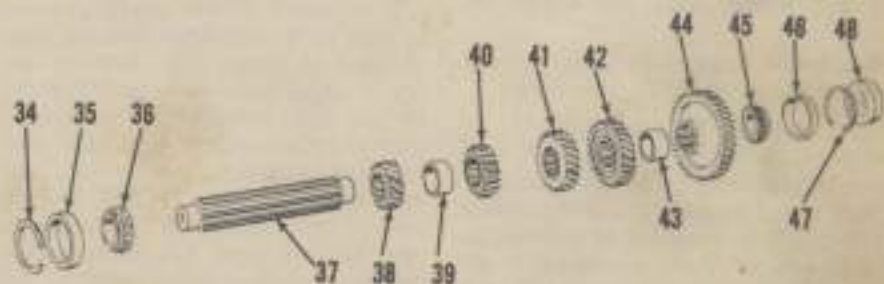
Exploded view of the D-17 transmission countershaft (37) and related parts.
